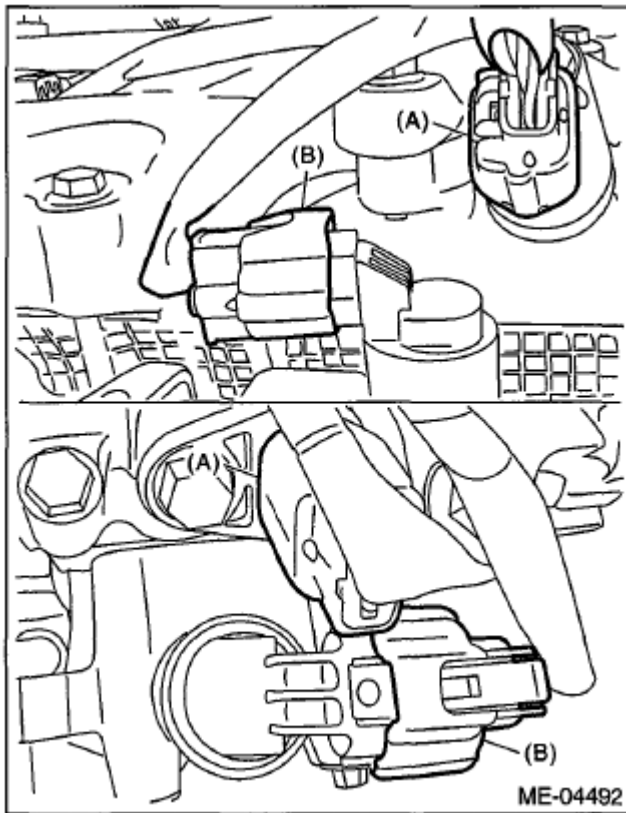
Identifying Exhaust Camshaft Position Sensor And Exhaust Oil Flow Control Solenoid Valve Connectors
